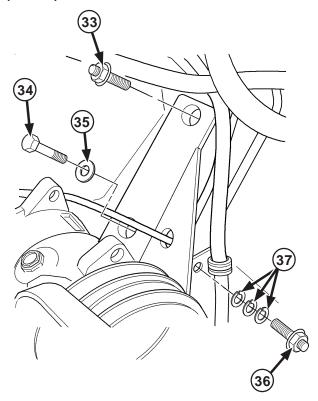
Compressor Mounting Bracket to Cylinder Head
